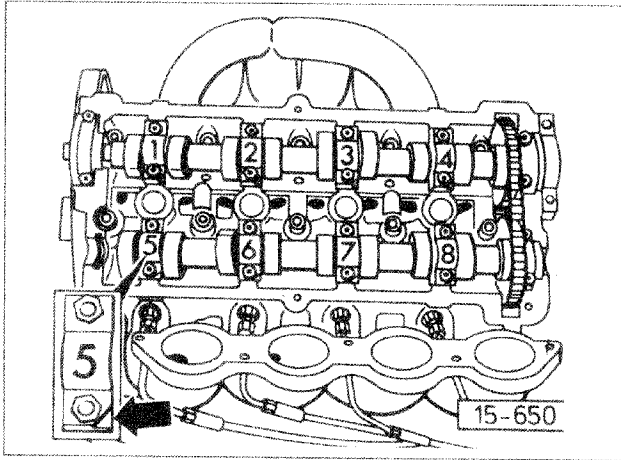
Identification of 16-valve engine camshaft bearing caps. Notice also three camshaft bearing end caps (not numbered). Inset shows proper installation (beveled corners face intake side).
